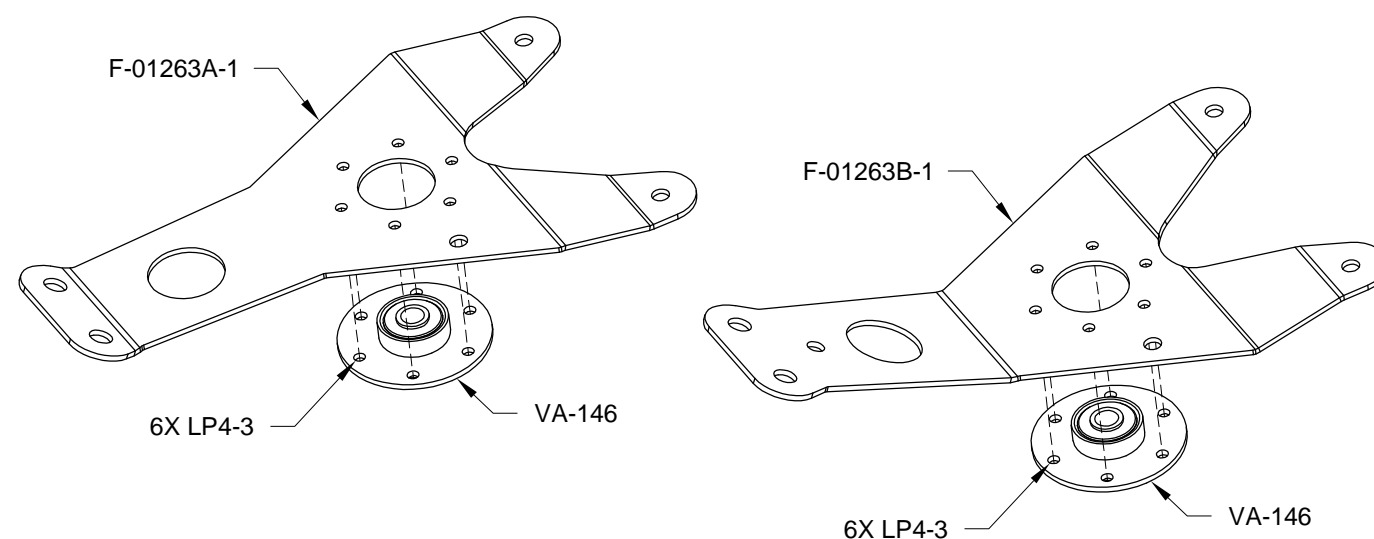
ATTACHING THE FLANGE BEARINGS
